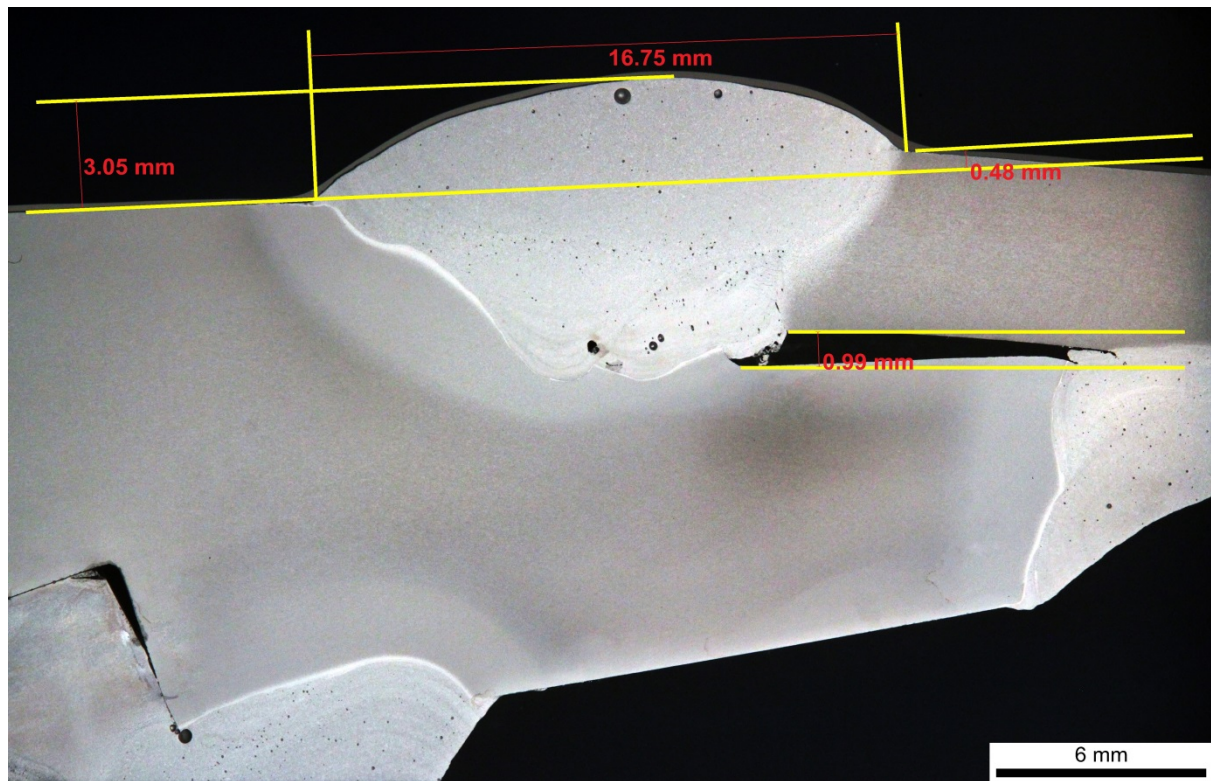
J3564 sample W05-06, slice 5, right hand side of Figure I63. Small lack of fusion defect at root of internal fillet weld. Scattered porosity. Significant bending of tanker shell.
